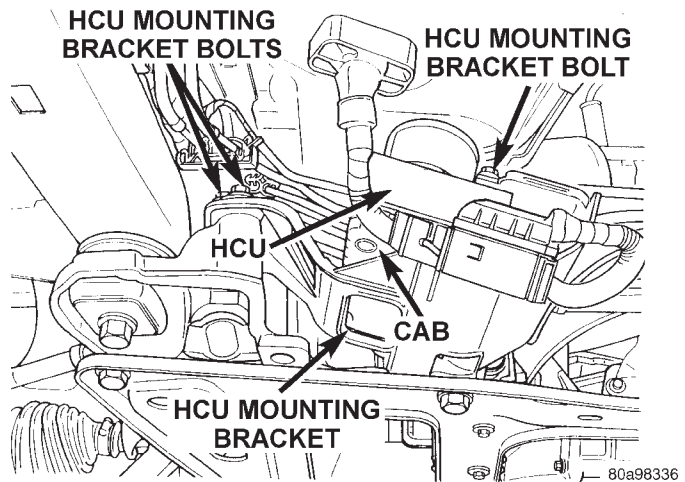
HCU To Suspension Cradle Mounting Bolts
